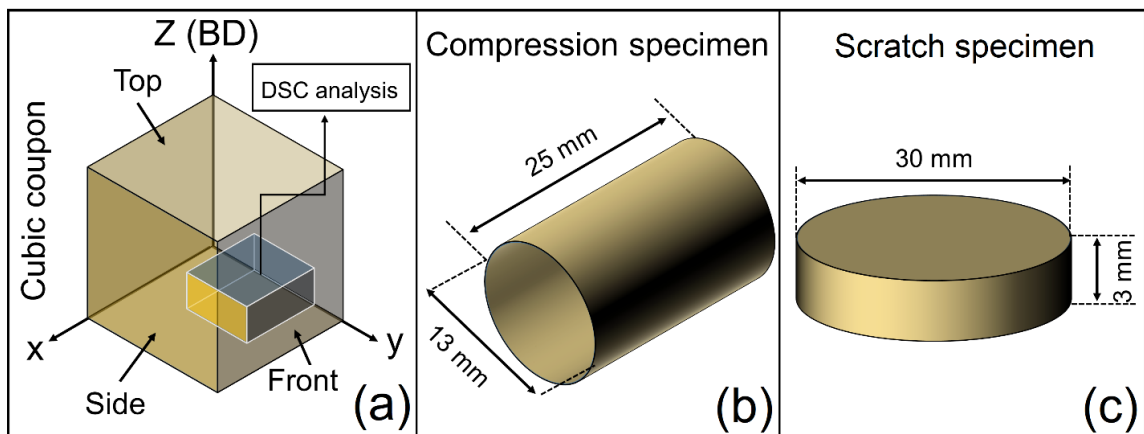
Schematic illustration of (a) cubic coupon, (b) compression test specimen, and (c) wear test specimen. “BD” in (a) refers to the building direction.
